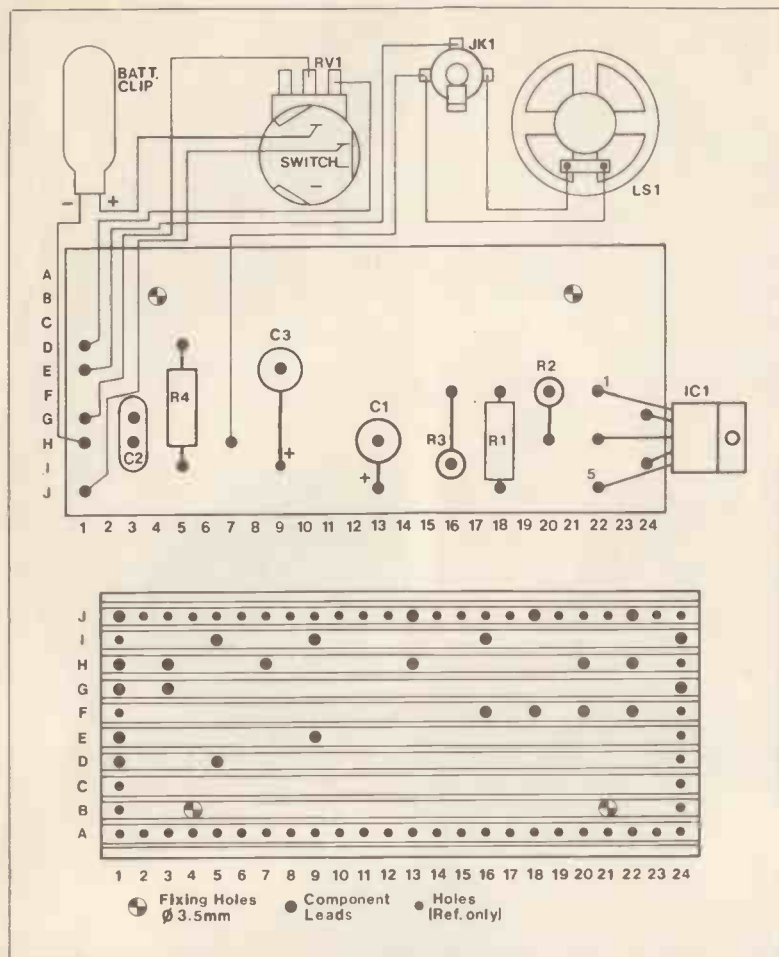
The Veroboard layout and wiring of the Tone Generator.
